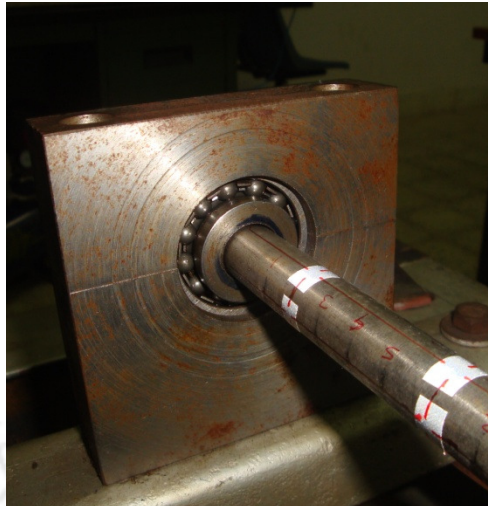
A close view of one end of the shaft, supported by a deep-groove ball bearing.
